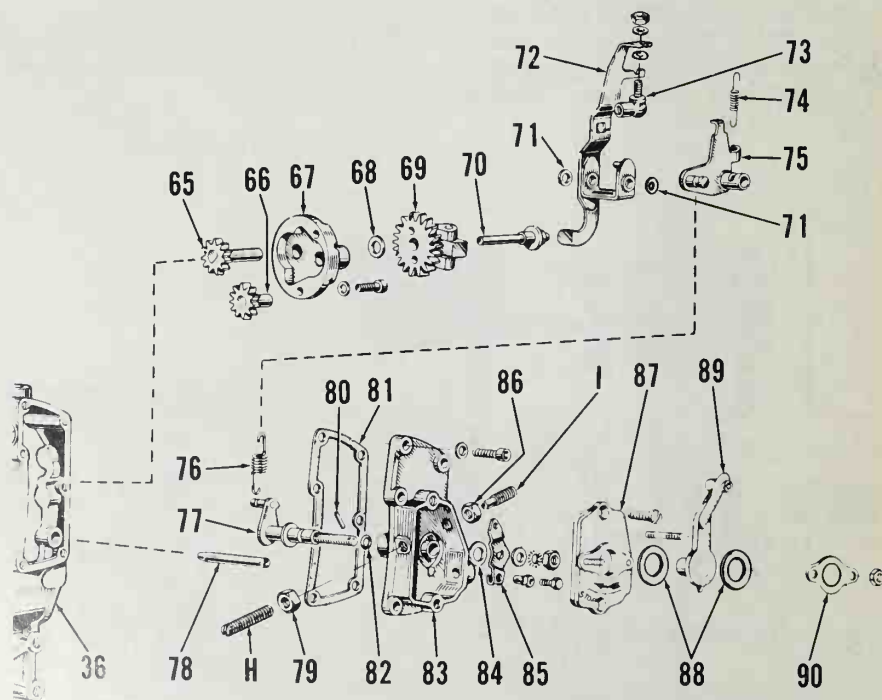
Exploded view of oil pump, governor and linkage.
